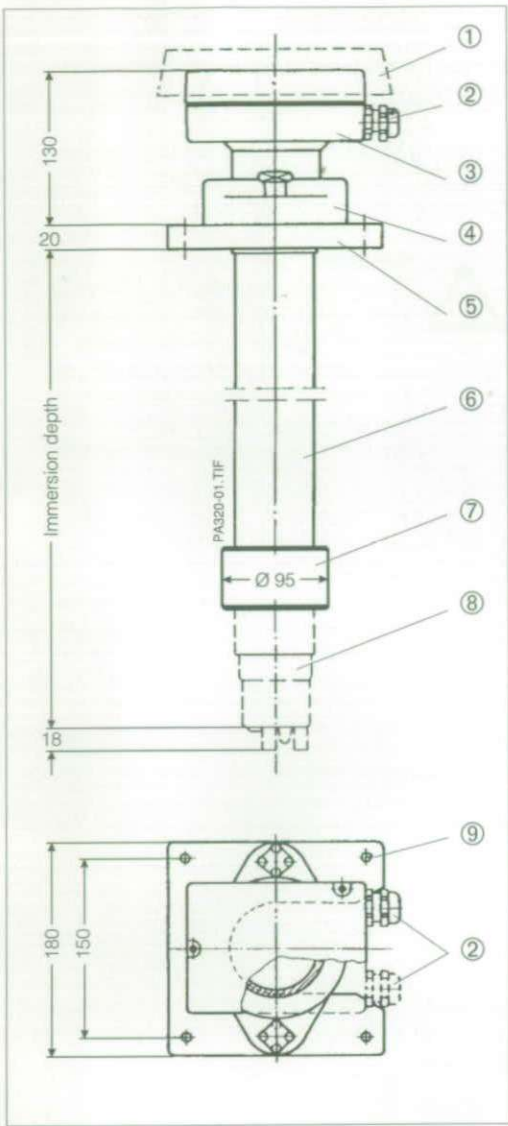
Immersion assembly CPA 110-S for installation of Sensopac CPA 320
